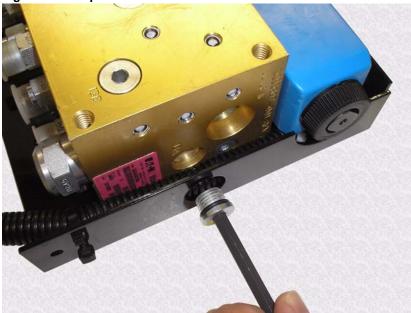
Plug Inserted into Steering Valve Plug Parked
